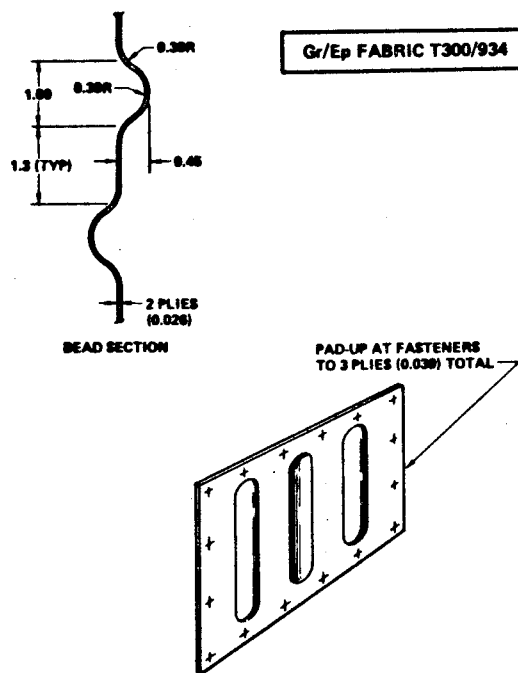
YC-14 Elevator Gr/Ep Rib Web Study - Beaded Stiffeners
